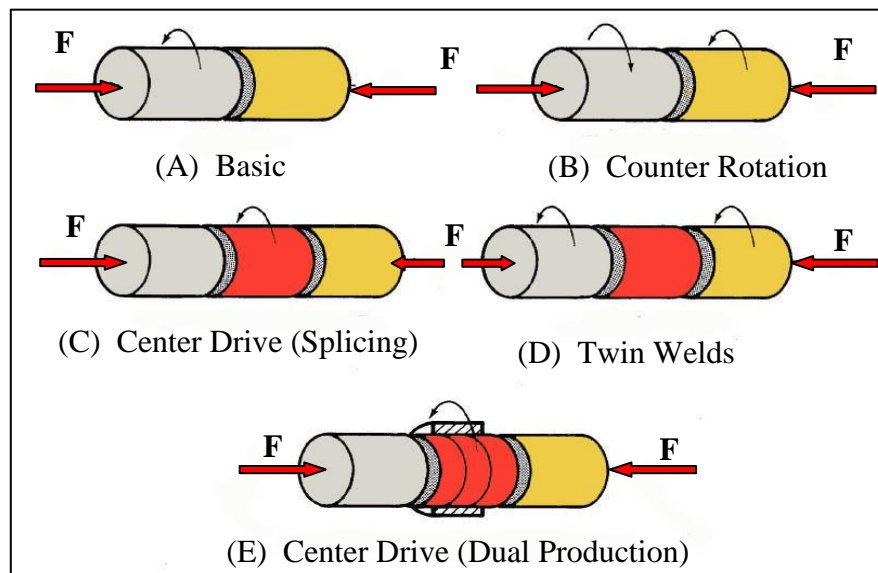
Typical Arrangements of Friction Welding (Robert, 1999)
